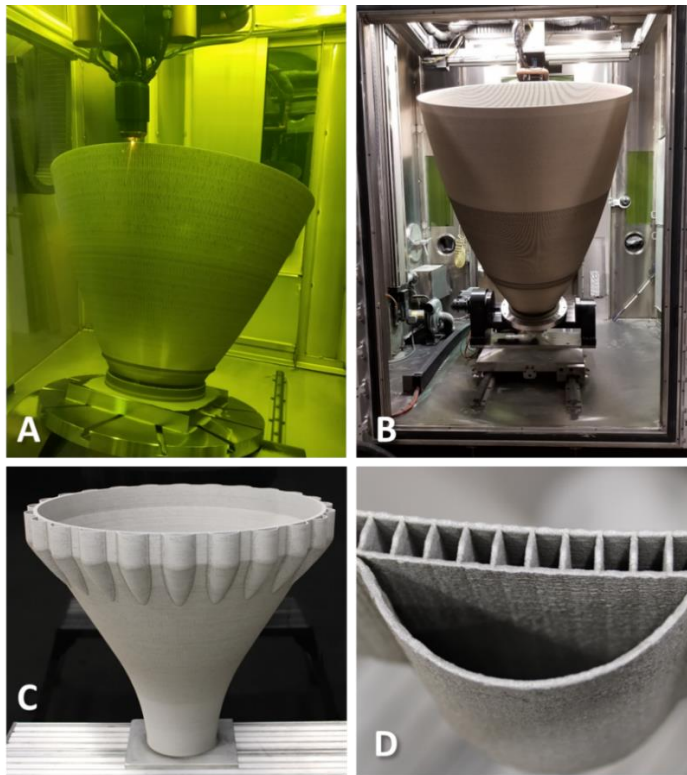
Examples of LP-DED manufacturing demonstrator heat exchangers built. A) LP-DED process shown depositing integral channels, B) Integral channel nozzle shown in LP-DED machine at 1.52 m diameter and 1.78 m height, C) Example of complex geometry using LP-DED aluminum 6061-RAM2, D) Examples of channels with 1.5 mm wall thickness in A6061-RAM2. From Ref. [6,7]
